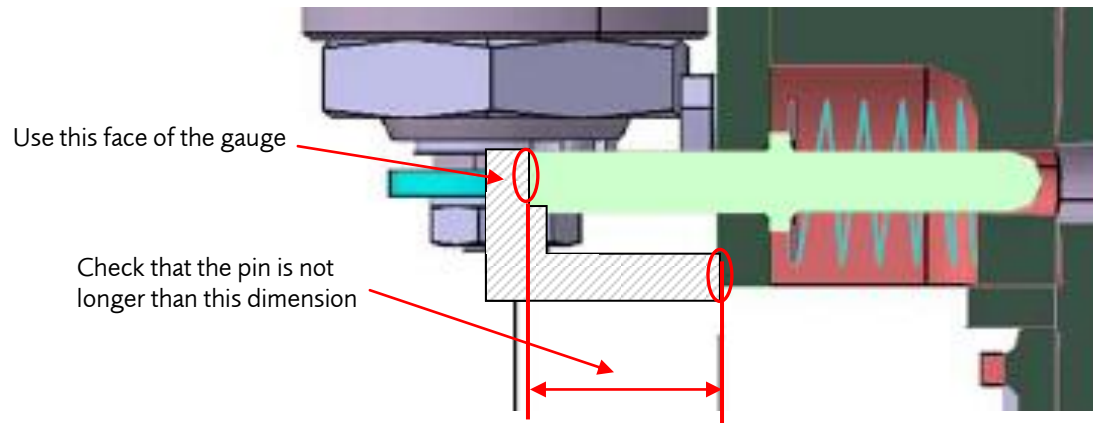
Maximum dimension for Extended locking Pin Gauge.
